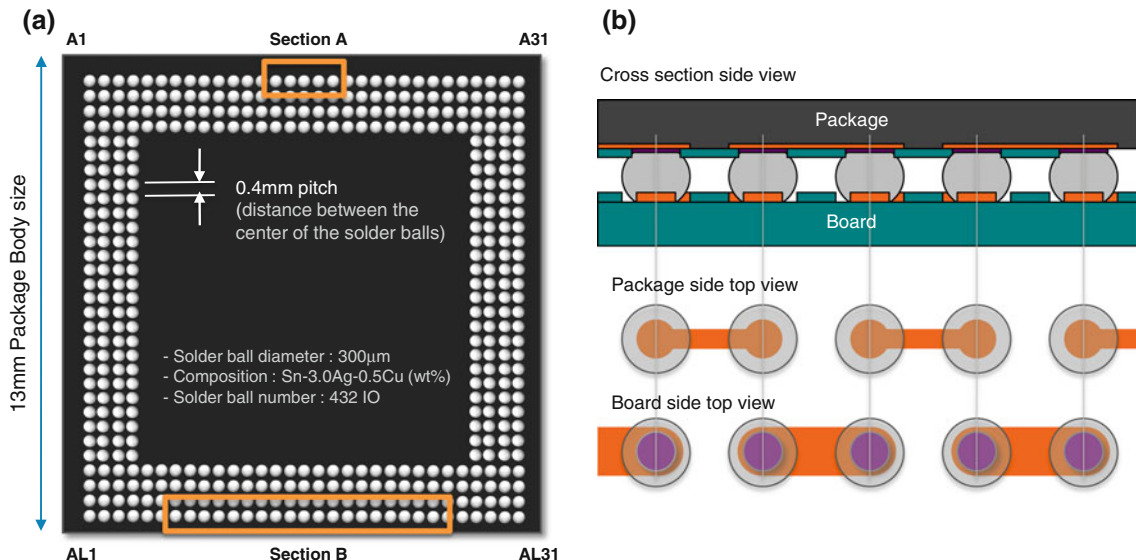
Fine-pitch BGA sample configuration (a) and schematic side-view after board assembly (b).
